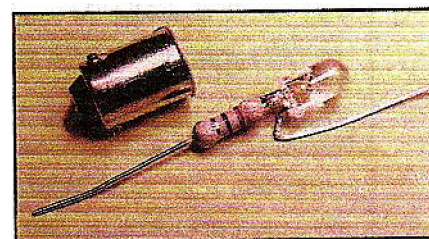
A completed LED and Its current limiting resistor ready to be soldered into the bulb base. Note how the leads are positioned for soldering.
